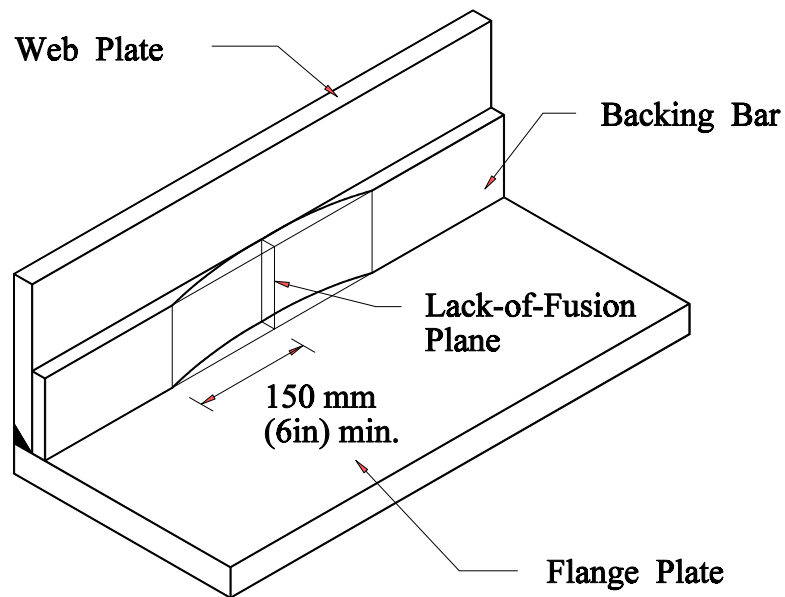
Removal of backing bar lack-of-fusion plane by grinding.
